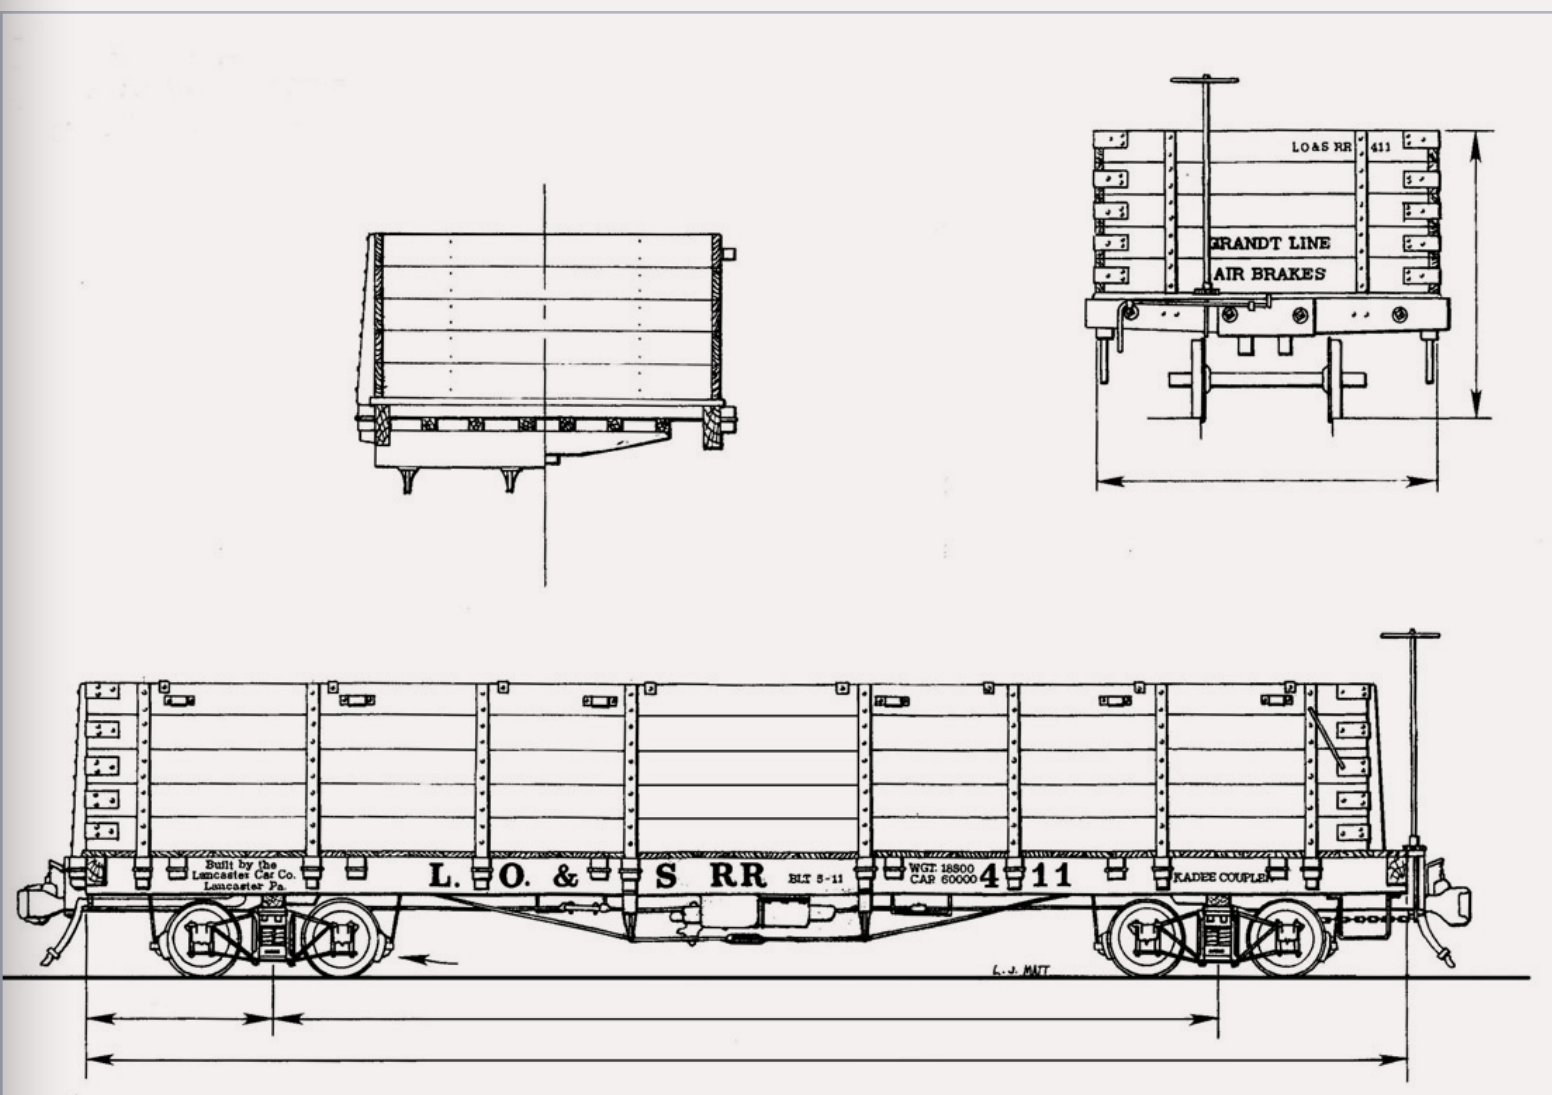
Fill in the dimensions on this drawing once you have determined what material you will use for your car. I sometimes forget to orient the correct end of my brake cylinder with my brake staff. Double check each piece before you glue.
